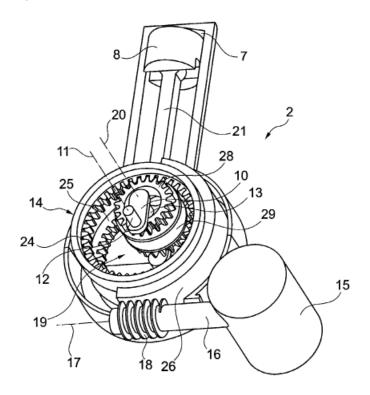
illustrates an eccentric gearing including a crank (10), (12), (13) which rotatably carries orbital gear (19), and further including ring gear (14), rod (21) and piston (8). Rotary motion of crank (10), (12), (13) and orbital gear (19) is converted into reciprocating motion of piston (8) which functions as a guided slide. Rod (21) moves only linearly and does not swing. The orbital gearing includes a ratio of 2:1 between the ring gear (14) and the orbital gear (19).
